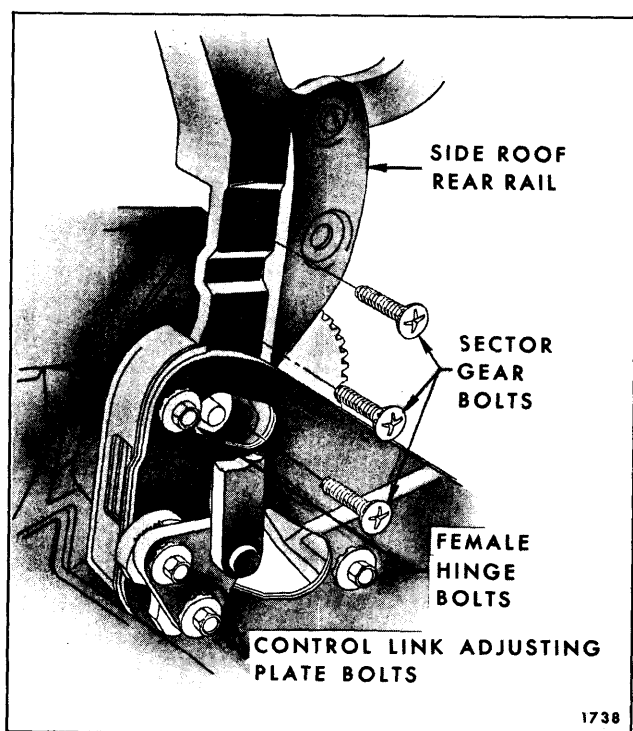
Actuator and Top Control Link Attachment - "Z" Styles
